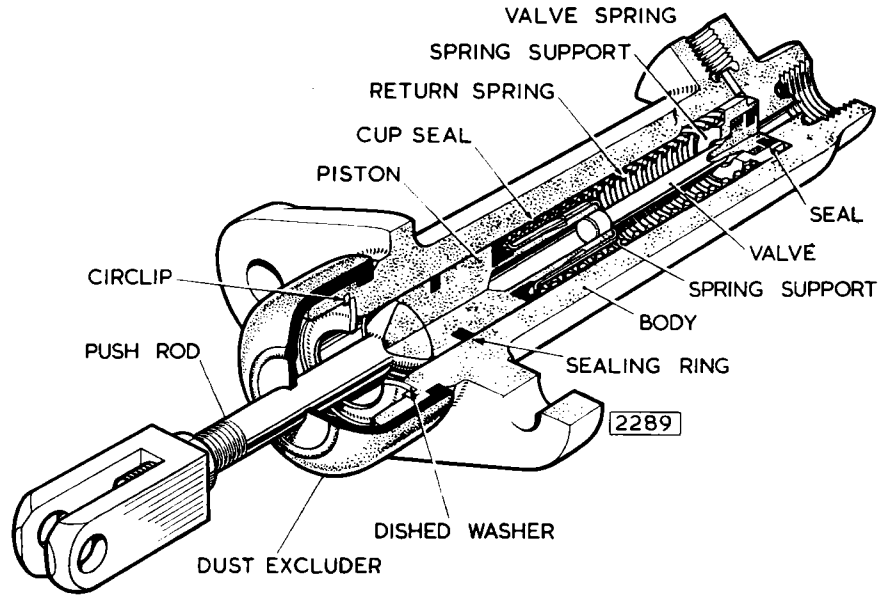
Sectioned view of the lower master cylinder (front brakes)
